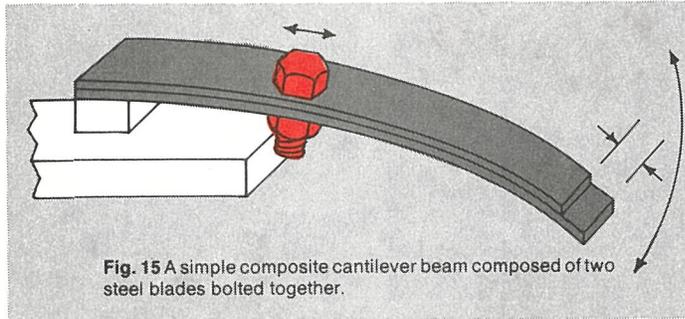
A simple composite cantilever beam composed of two steel blades bolted together.
